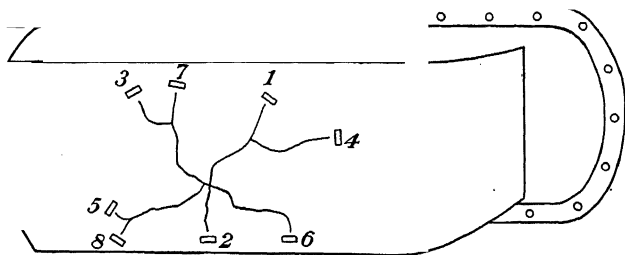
Cast-iron crankcase showing fractures. Numbers indicate order of tack welds necessary to prevent creeping of fracture.
